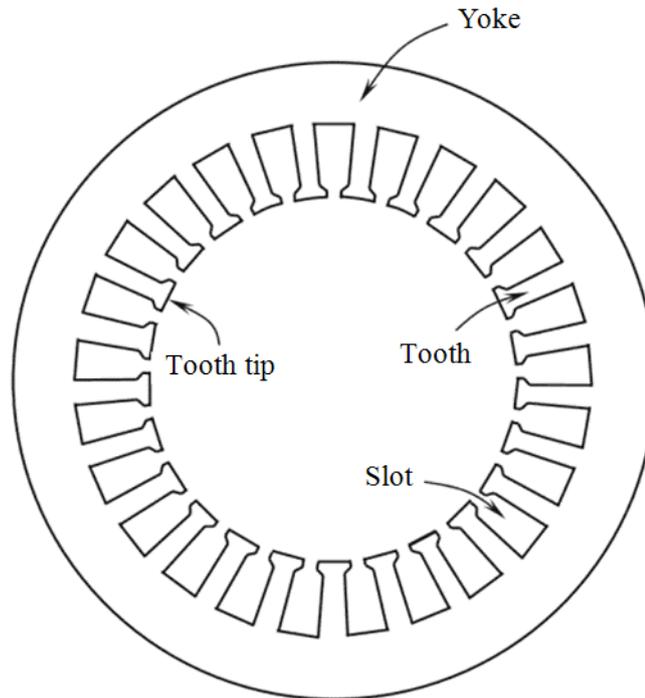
Complete stator cross-section sheet made of electrical steel (Tong, 2014).
